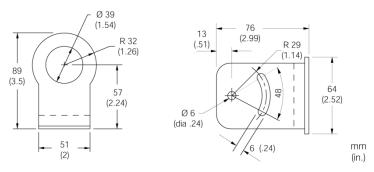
Dimensions of the fixed bracket (XXXTXXACFB)
